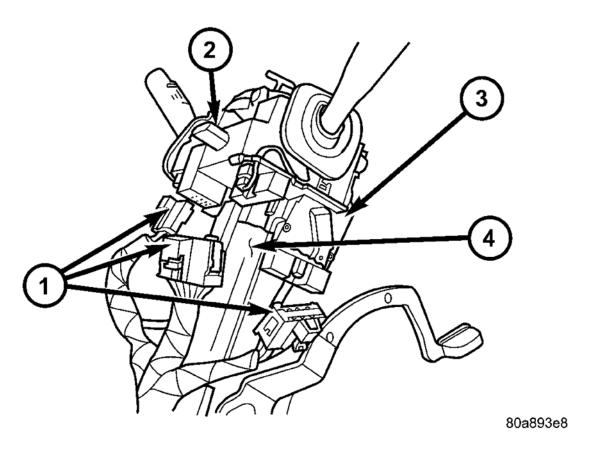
Steering Column Mounting Courtesy of CHRYSLER LLC
